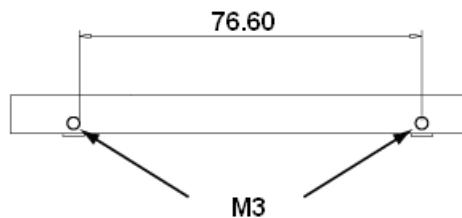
2.5" SATA SSD 3TS6-P Mechanical Screw Hole
